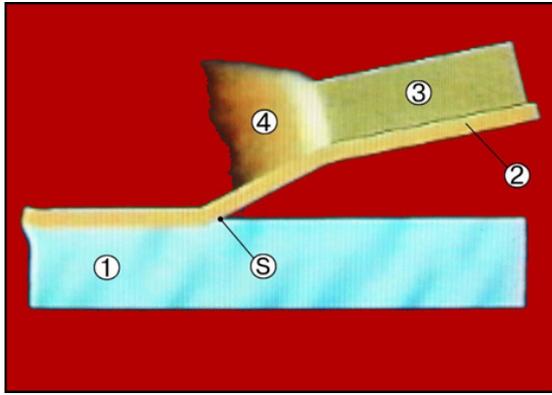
Principal schemes of explosion welding process with an angle between metal sheets 1 - base plate; 2 - cladding plate; 3 - explosive; 4 - detonation products; S - point (line) of contact of surfaces during welding.
